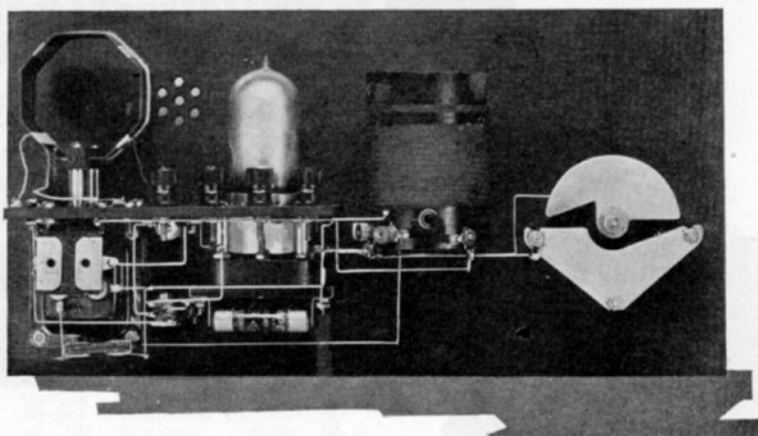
See how neatly the tube panel unit fits in with the other parts mounted on the front panel.
